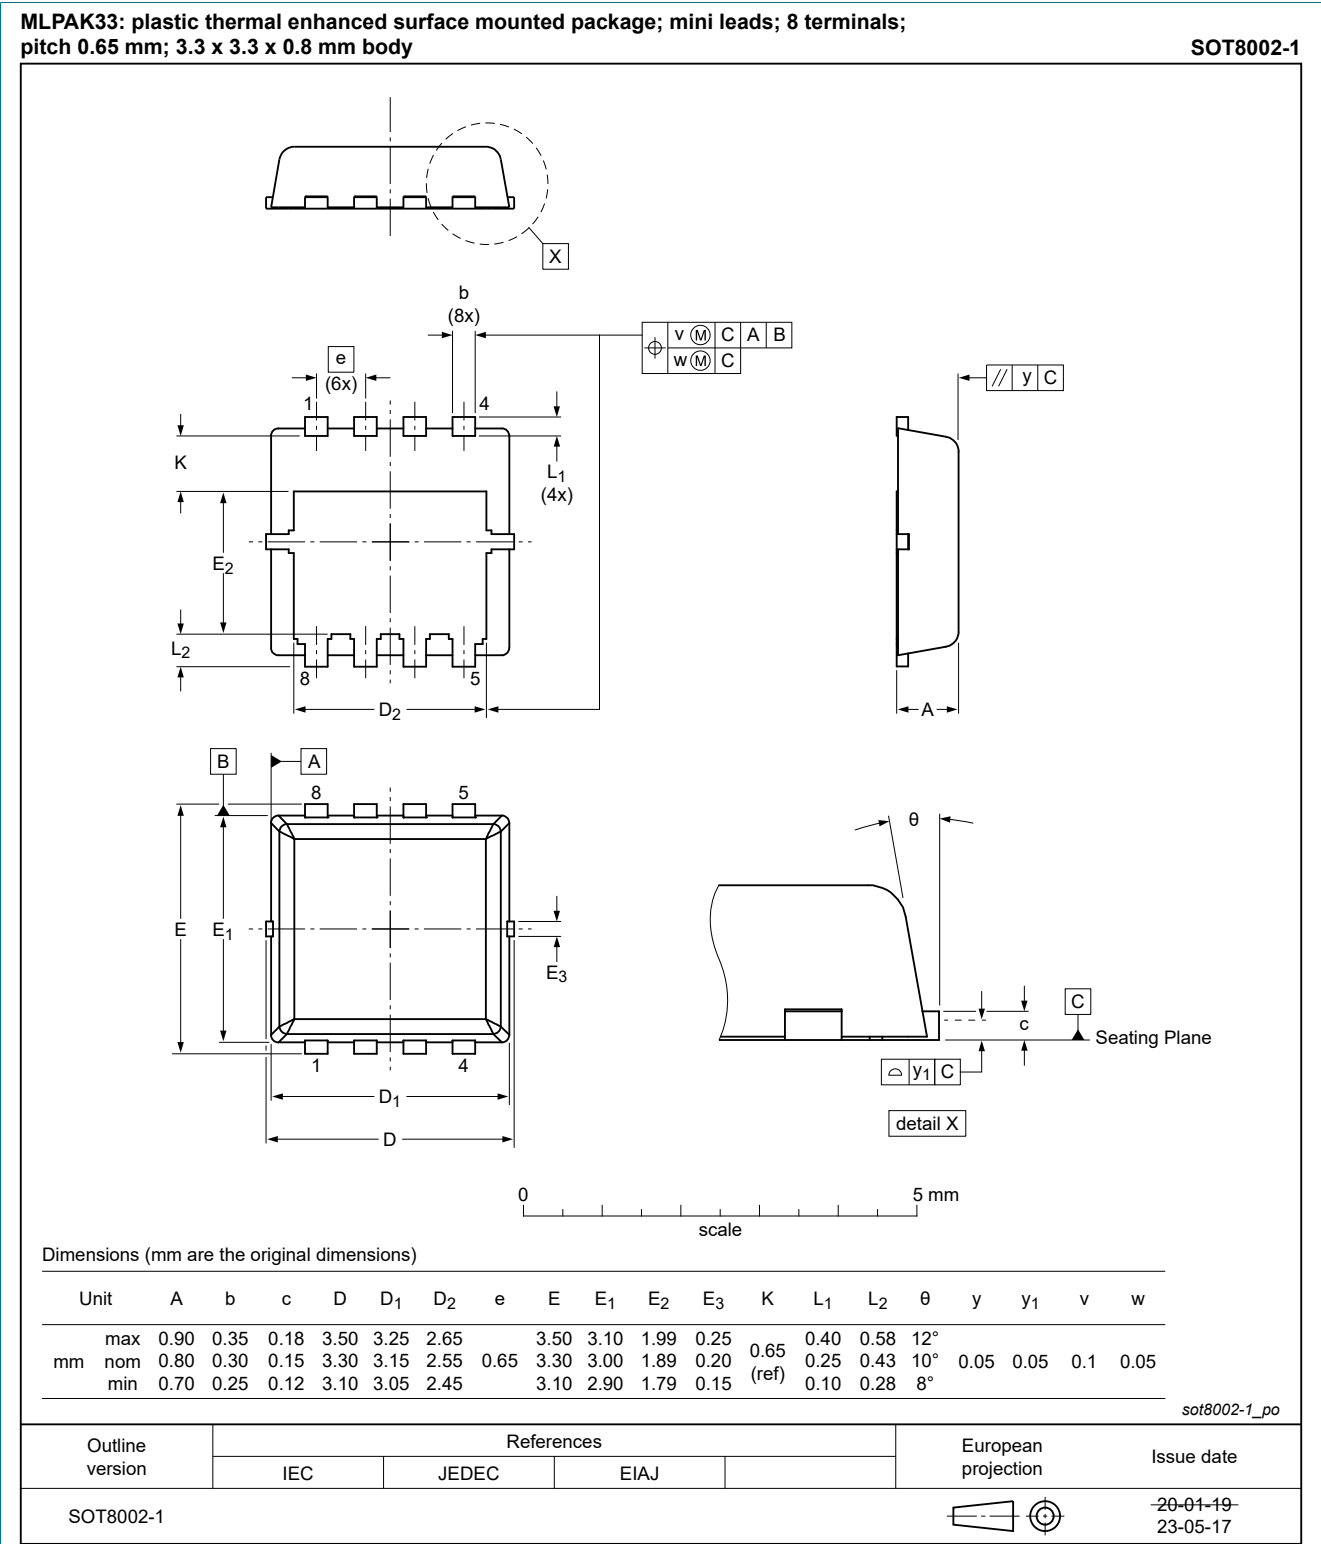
Package outline MLPAK33 (SOT8002-1)
